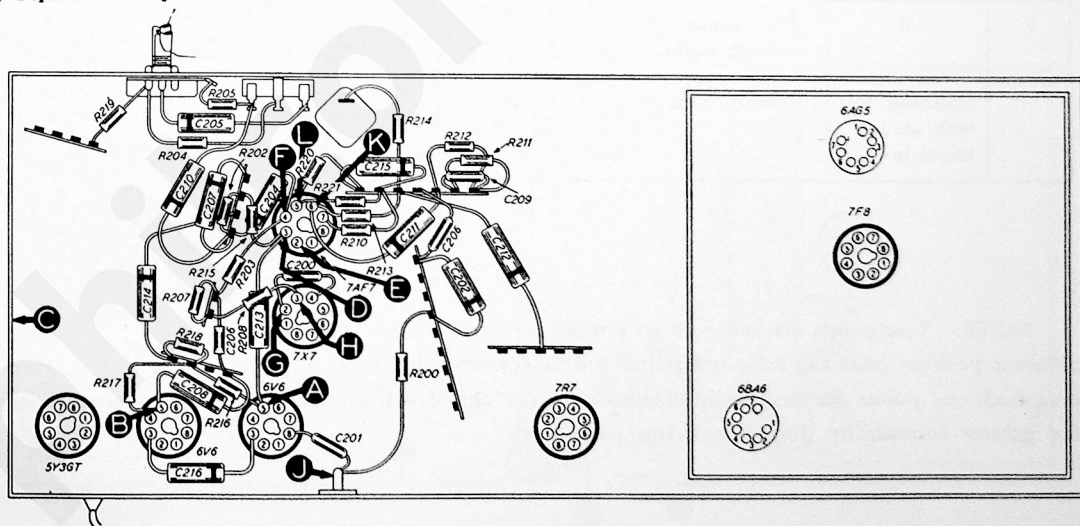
BOTTOM VIEW, SHOWING SECTION 2 TEST POINTS.
